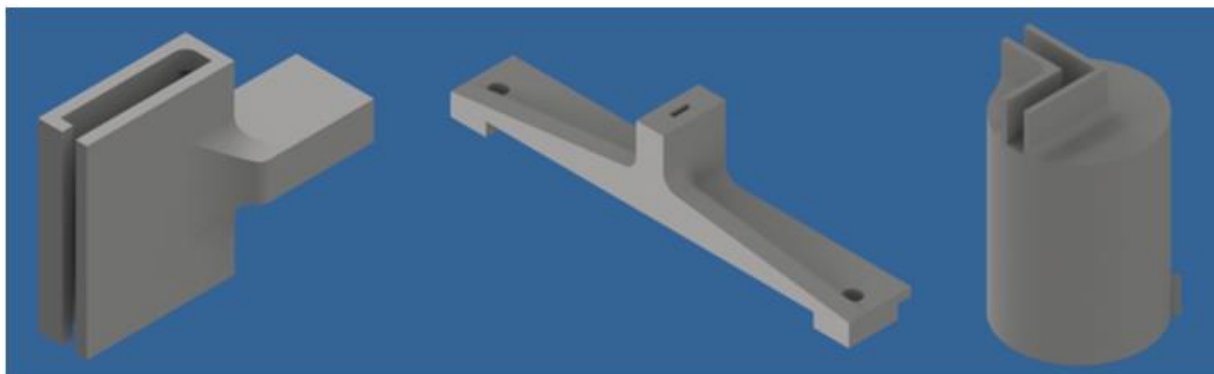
CAD drawings of the parts that were used to evaluate the motion of the robotic device.
